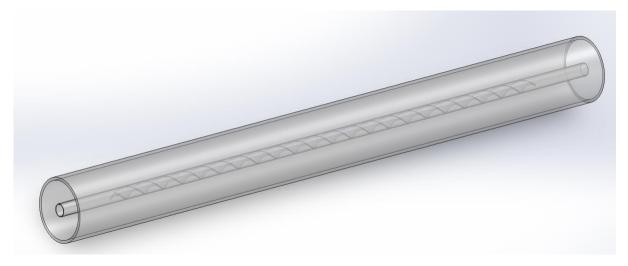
Assembled model of the double tube with twisted tape for TR 4
